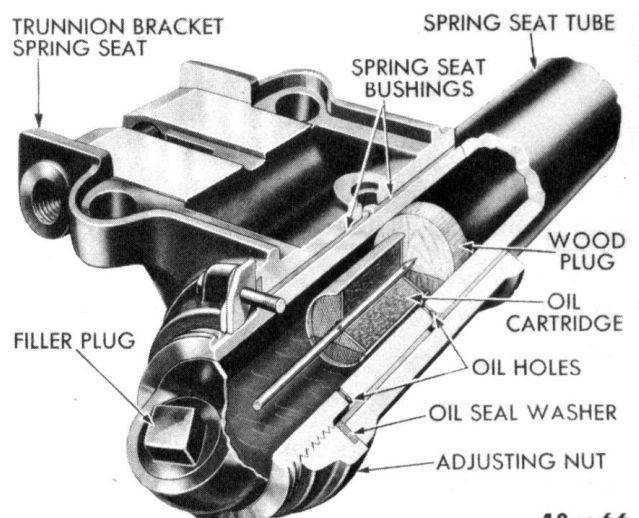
Trunnion Bracket Spring Seat Assembly (Cutaway View)
